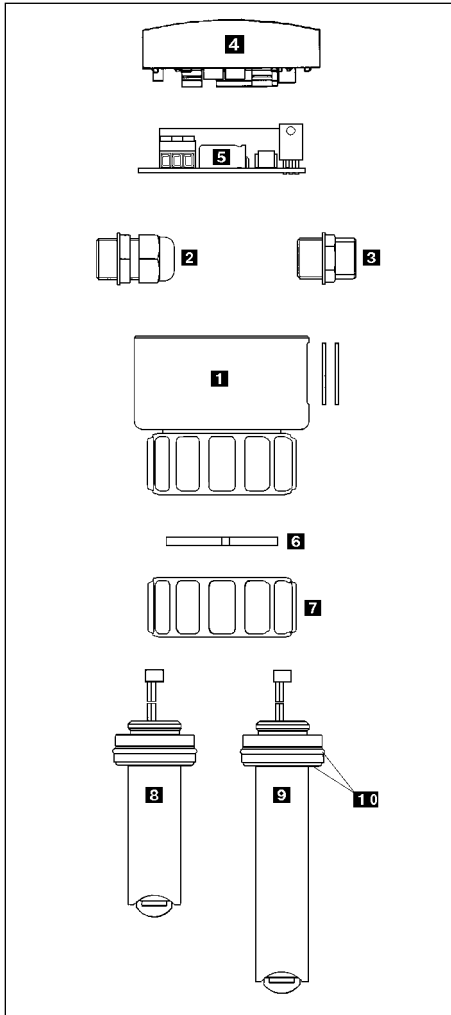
Spare Parts Explosion Drawing 8025 Compact Version
